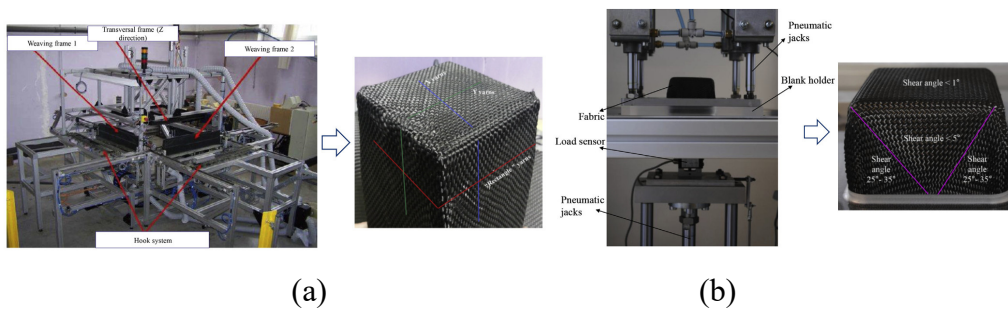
Classification of preforming process, (a) braiding preforming and (b) stamping preforming [28].
